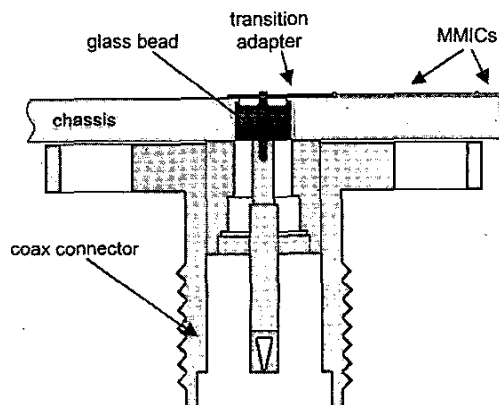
Assembly diagram of the perpendicular coax-microstrip transition. A K flange launcher is shown, but threaded "sparkplug" launchers can be used as well.
